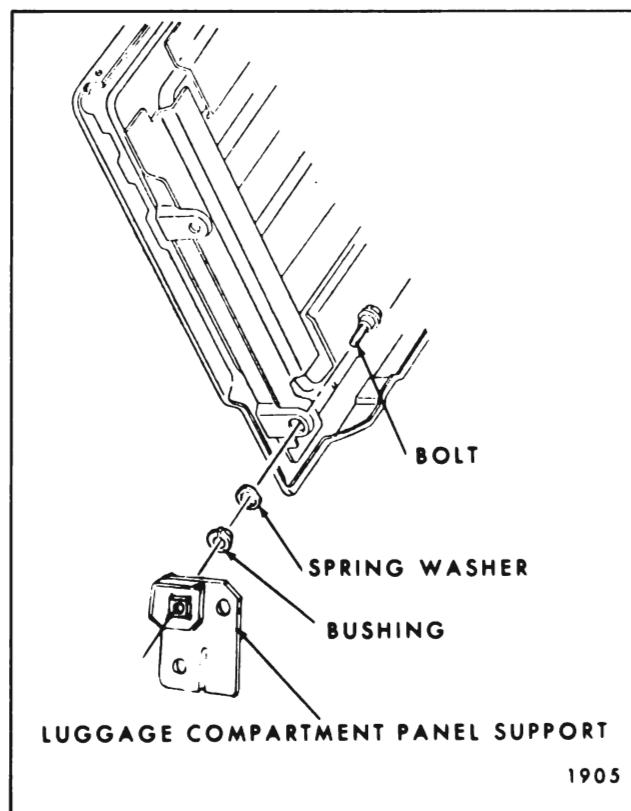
Luggage Compartment Panel Attachment to Body
